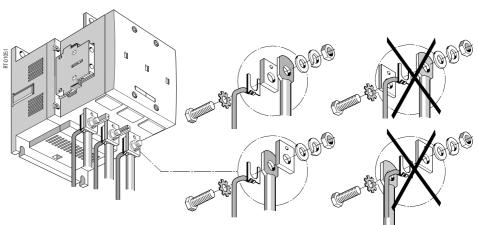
Cable connection of the main circuit surge suppressor module
